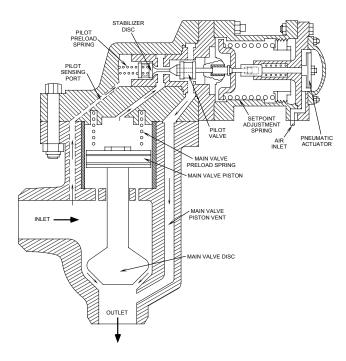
Two-stage Target Rock SRV in the open position (courtesy U.S. NRC Technical Training Center)
